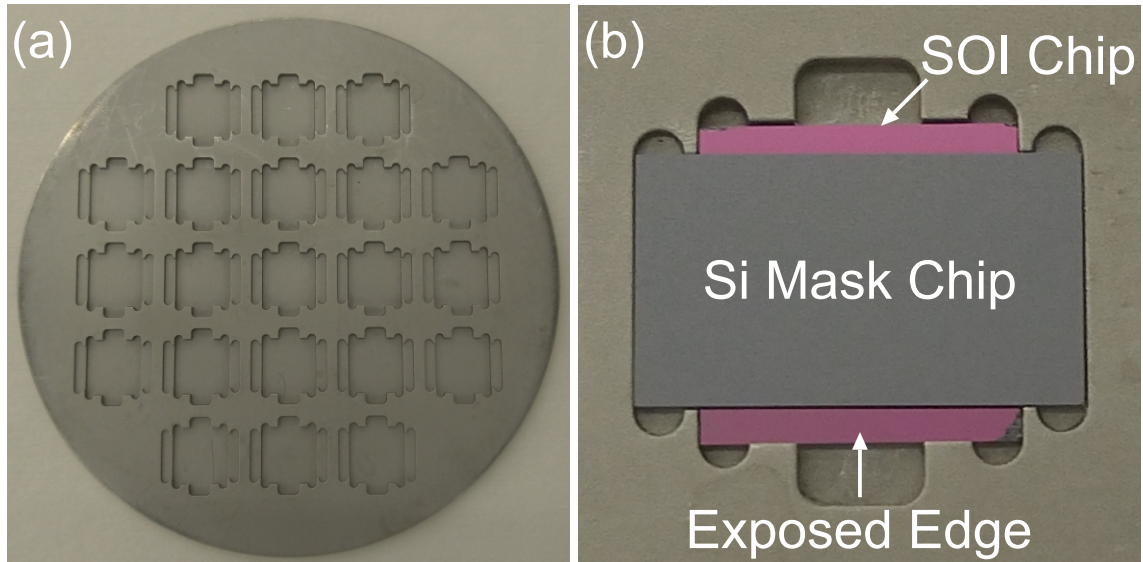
(a) Photograph of the custom aluminum holder designed for the double exposure edge bead removal process. (b) Photograph of a 1cm×1cm SOI chip placed in the holder and masked by a 8.0mm×14.0mm Si masking chip. This exposes 1.0mm on the top and the bottom, as well as the four corners for the first, high dosage exposure to remove the photoresist edge bead and corner deposits.
